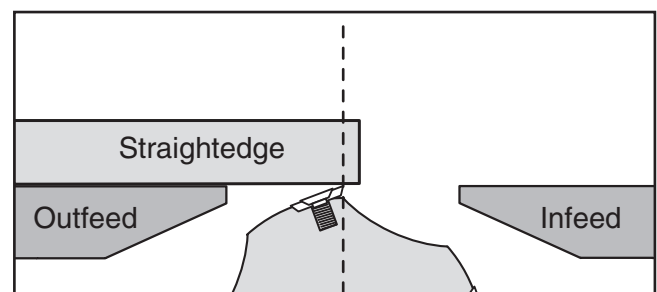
Using straightedge to align outfeed table height with carbide insert at TDC.
